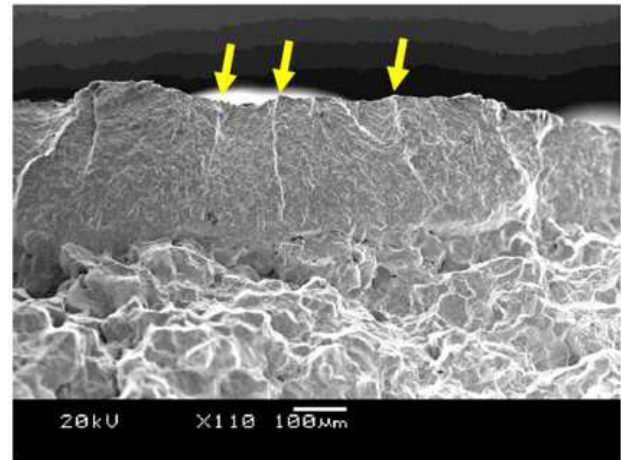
fatigue cracking on wye ring prior to failure.
